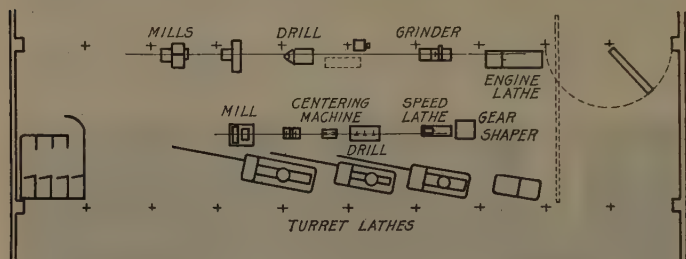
LAYOUT OF DEPARTMENT FOR MACHINING APRON AND TURRET-SLIDE PARTS
